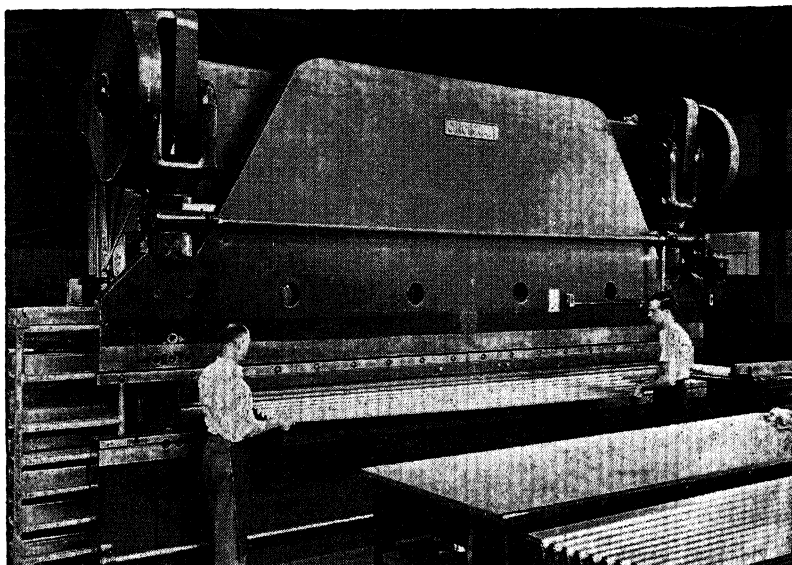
Housing feet, bed lugs, table box, ram brace, scrape chute and back gauge angles of this all steel shear are arc welded.
